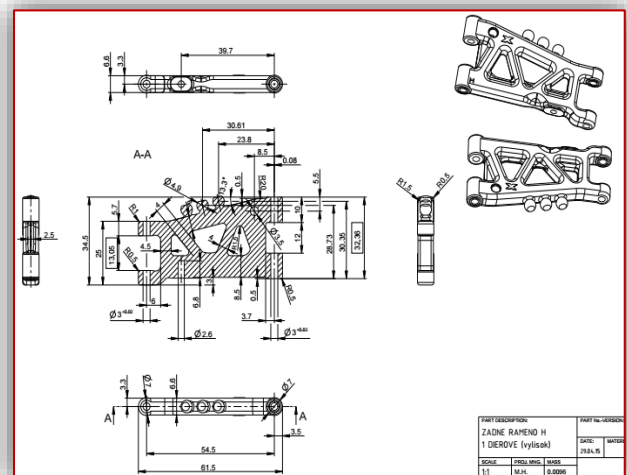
Design of pendant arm used in RC car (injection moulding part)
